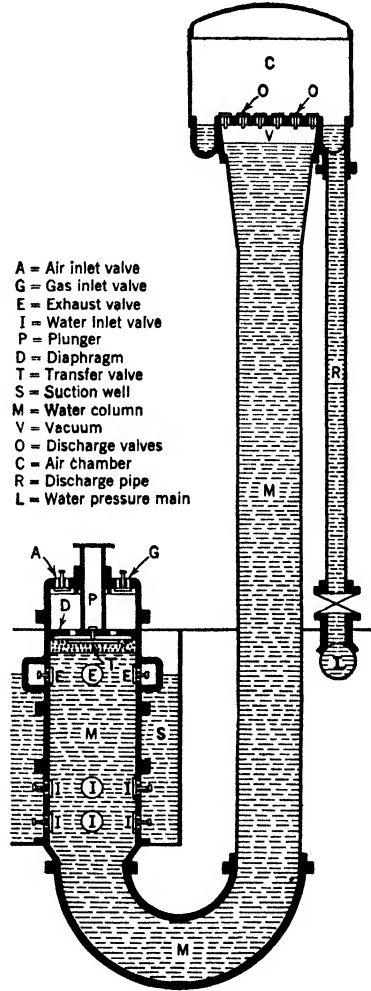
Two-stroke cycle arrangement, Steckel-Humphrey gas pump.
